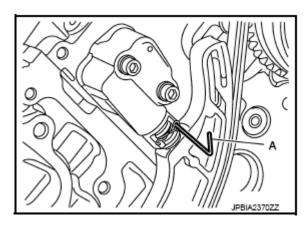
Identifying Slack Guide Mounting Bolt Gap Courtesy of NISSAN NORTH AMERICA, INC.
